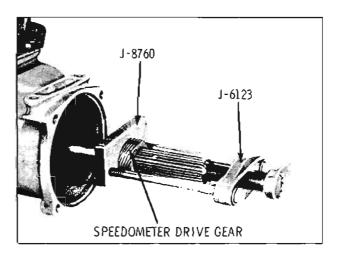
Removing Speedometer Drive Gear NOTE: Use 6-1/2" bolts for standard housing and 16" bolts threaded approximately 5" for extended housing.
